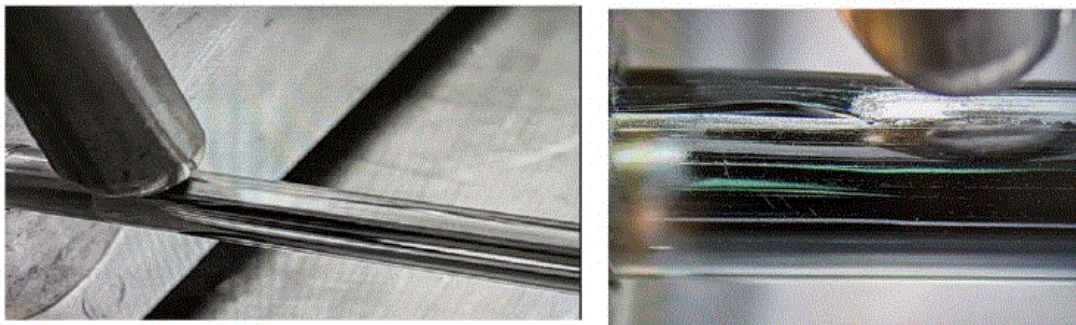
An ultrasonic head and a straw during the welding process (left) and a zoomed view of the seam during the welding(right).
